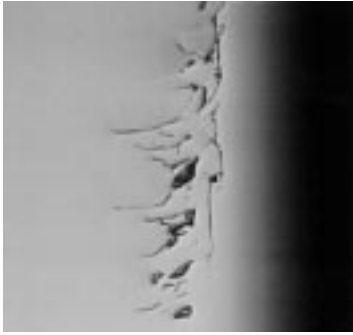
Crack Near the Edge of a Wafer Surface Due to Mechanical Contact, No Preparation Required, Magnification 750 $\times$ .
